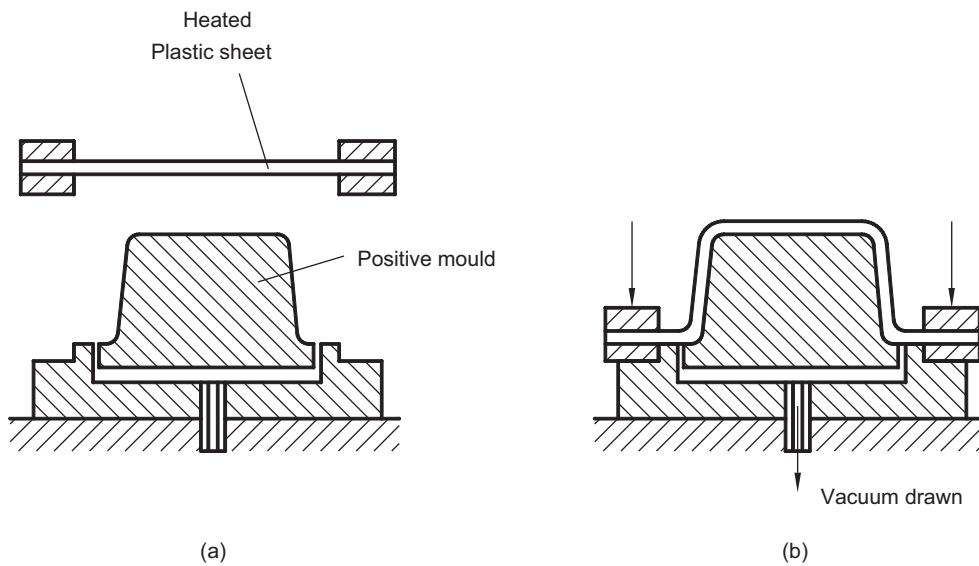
Steps in pressure-thermoforming process: (a) Plastic sheet is clamped in a frame, attached to the mould and heated (b) Pressure applied on the top forces the plate to follow the contour of the mould. Vacuum is applied from the bottom to assist the forming process
